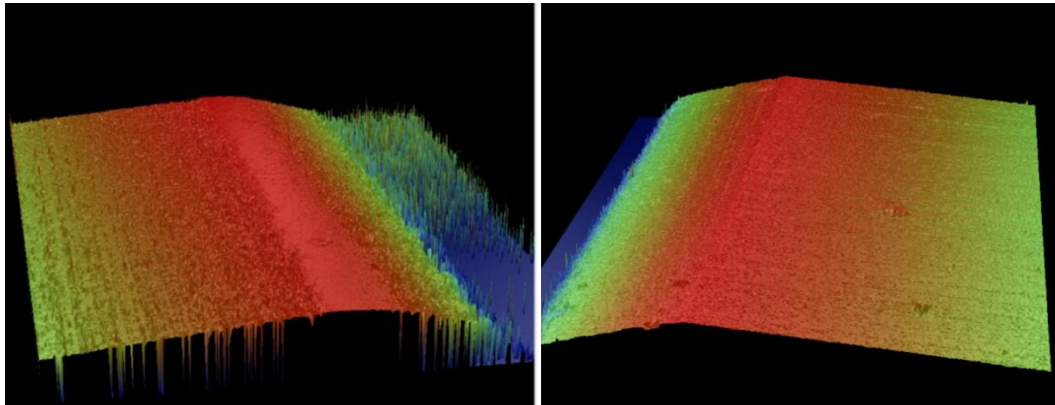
Left: Flank- chamfer by Wyko; Right: Chamfer-cutting face by Wyko
